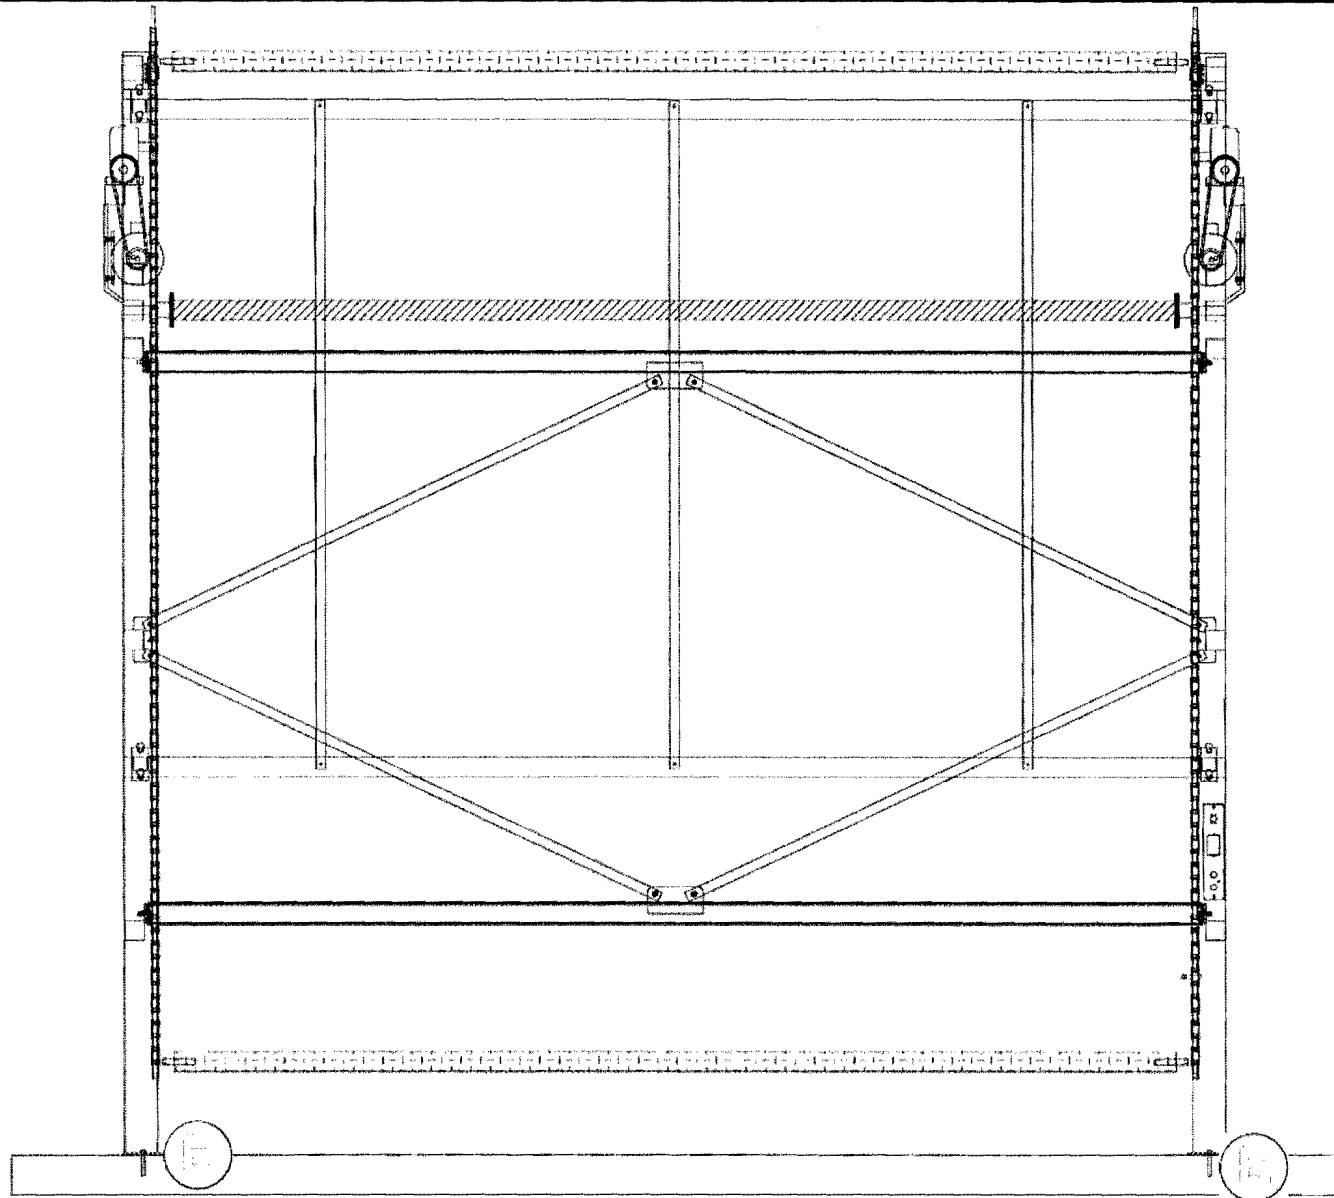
(A)—TIRE CARRIER ASSEMBLY
